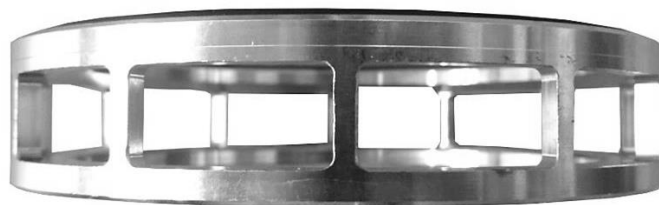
Picture of the eye ring used to separate the two rotor plates and support the packing.
